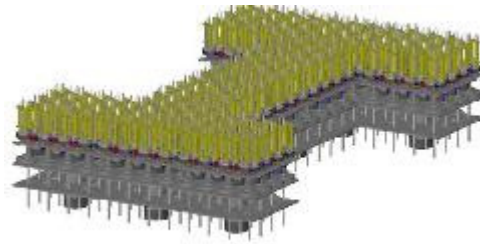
Example of a braider scheme to produce 3D braided cross section shape developed by 3TEX^[91]
